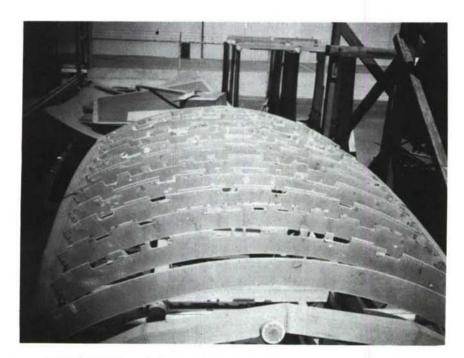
b. NONCONSTANT SECTION MALE BOND TOOL
